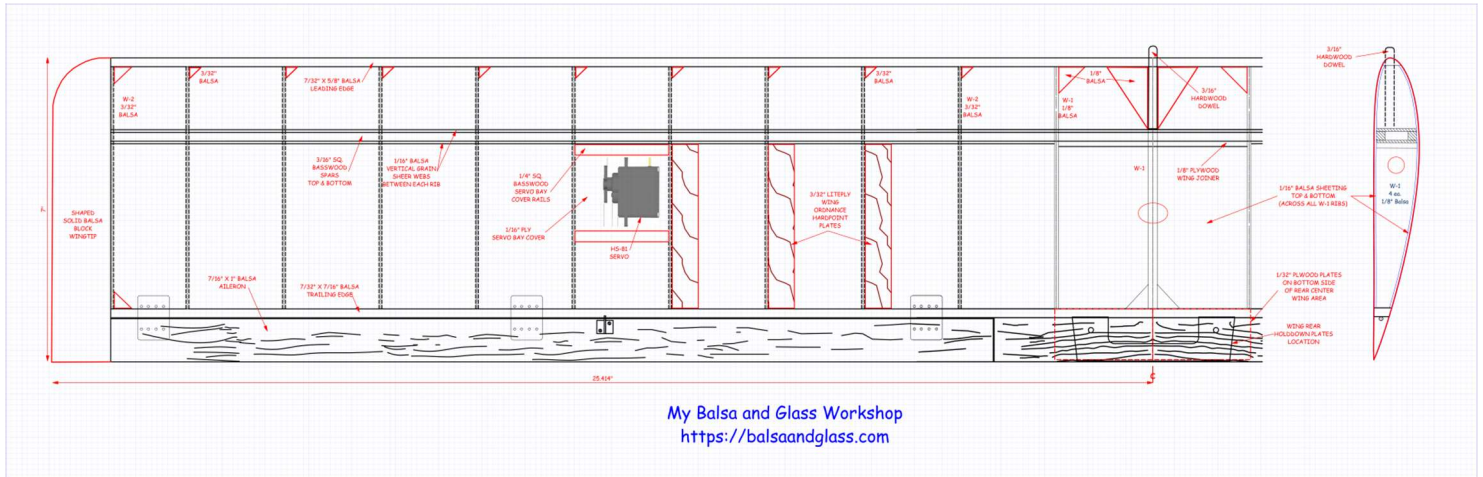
OA-1K Left Wing Half 2D CAD Plan
